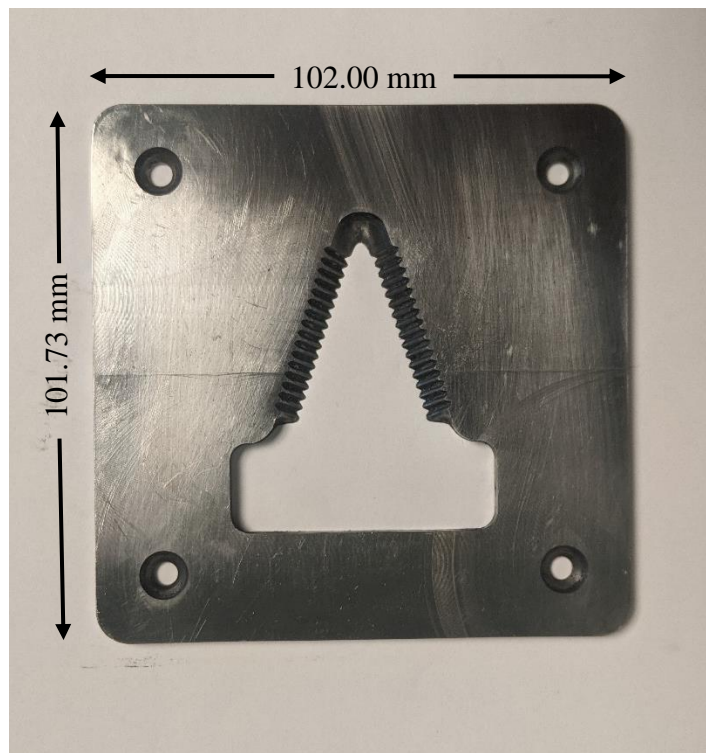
Machined half-feed combine harvester small bottom blade forging punch plate
